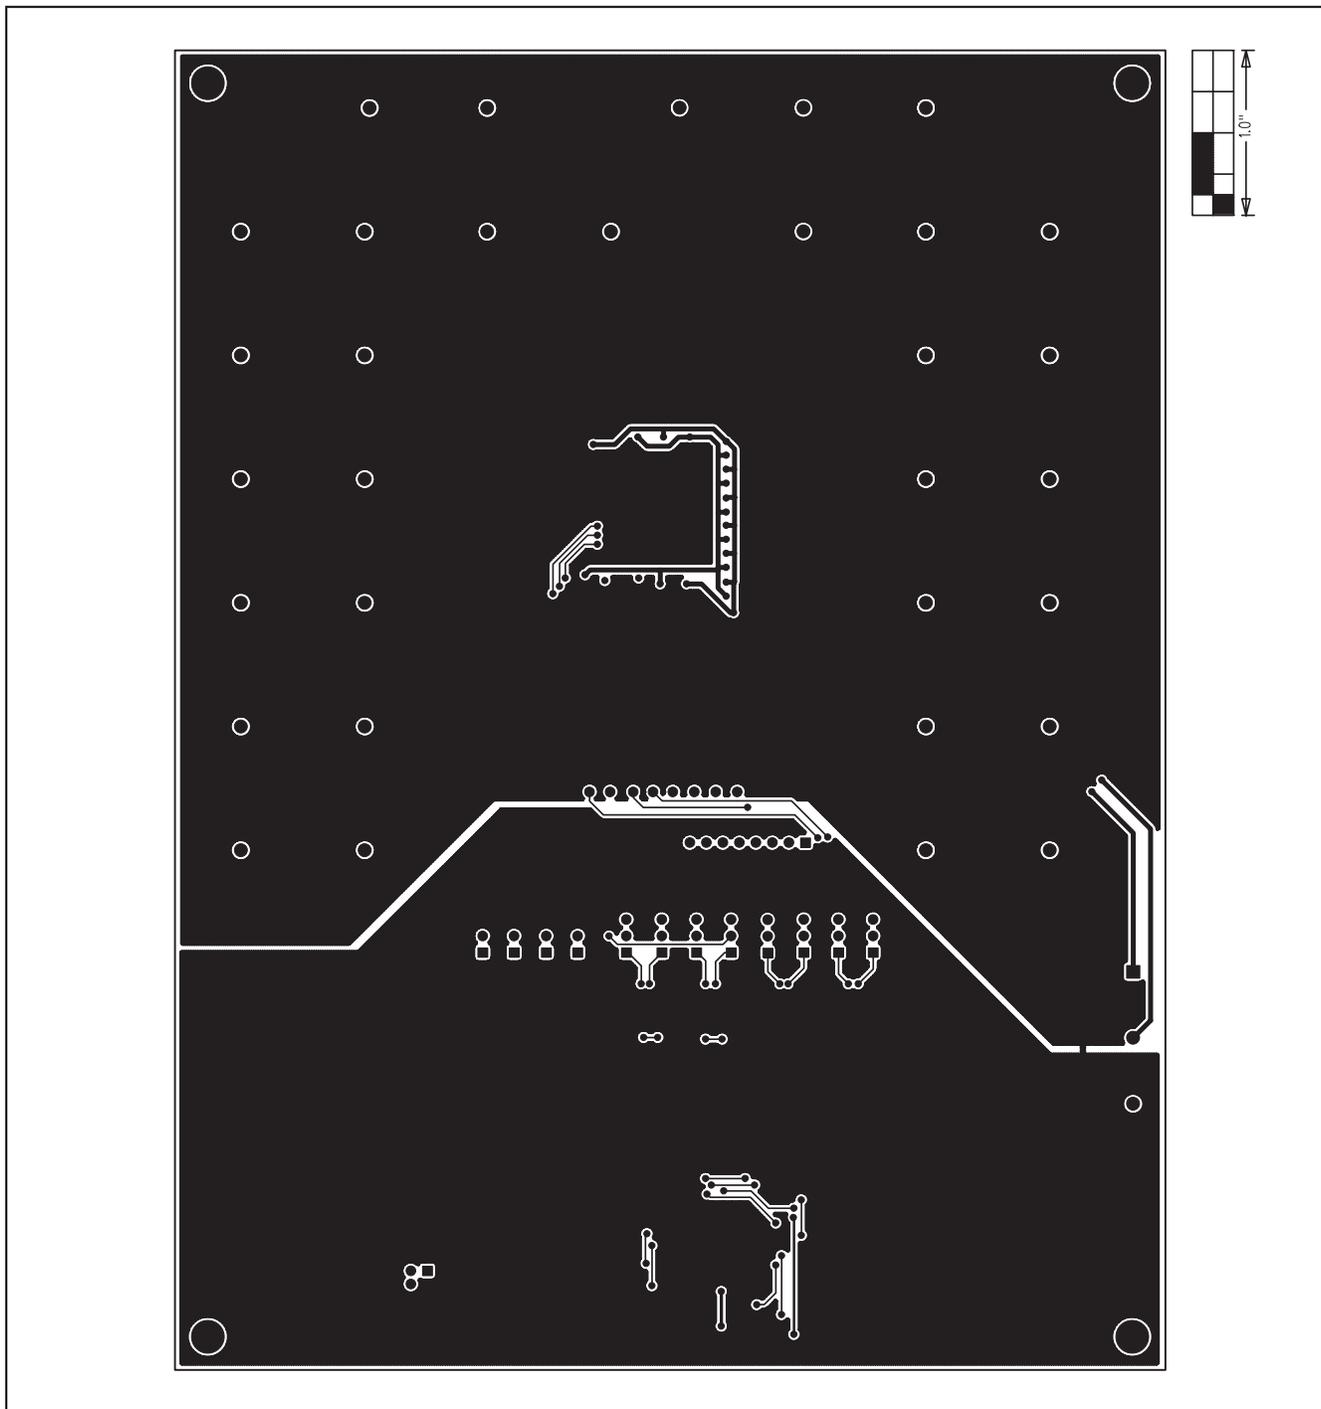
MAX9675 EV Kit PCB Layout—Solder Side
